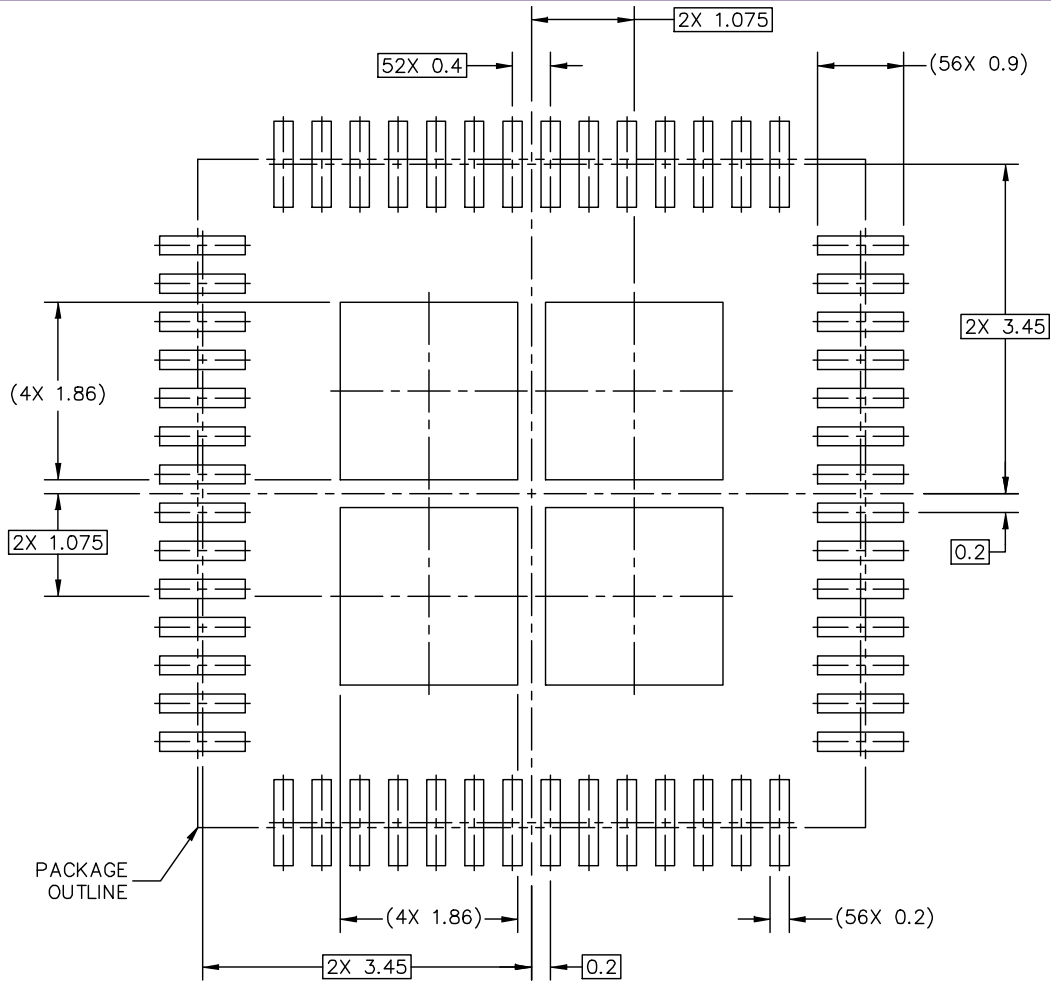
PCB Design Guidelines – Solder Mask Opening Pattern
